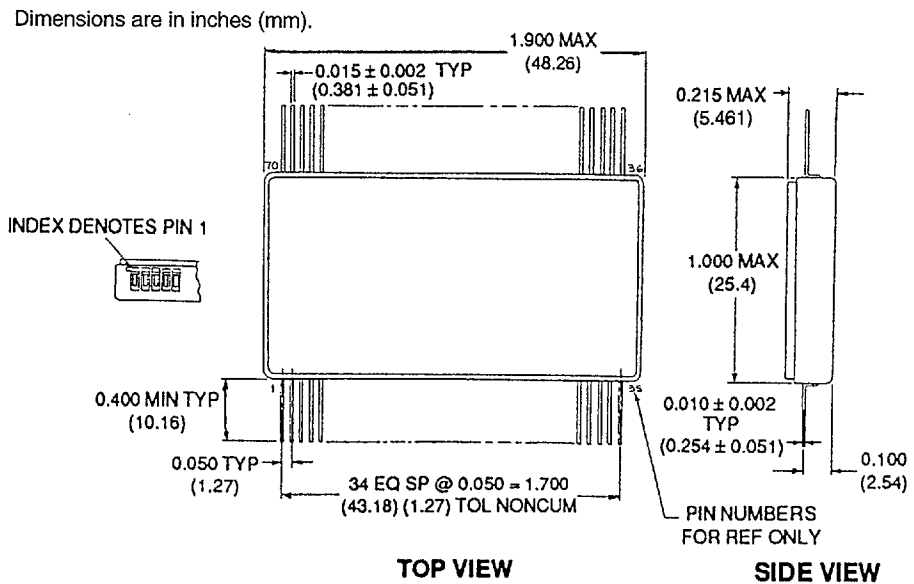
BUS-65163 MECHANICAL OUTLINE
